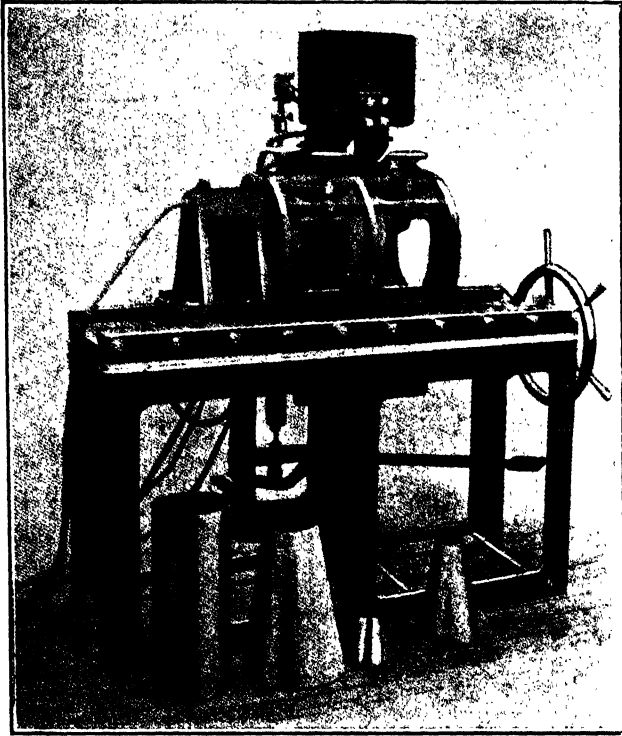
SEAM WELDING MACHINE FOR CYLINDERS AND LIKE STRUCTURES.
